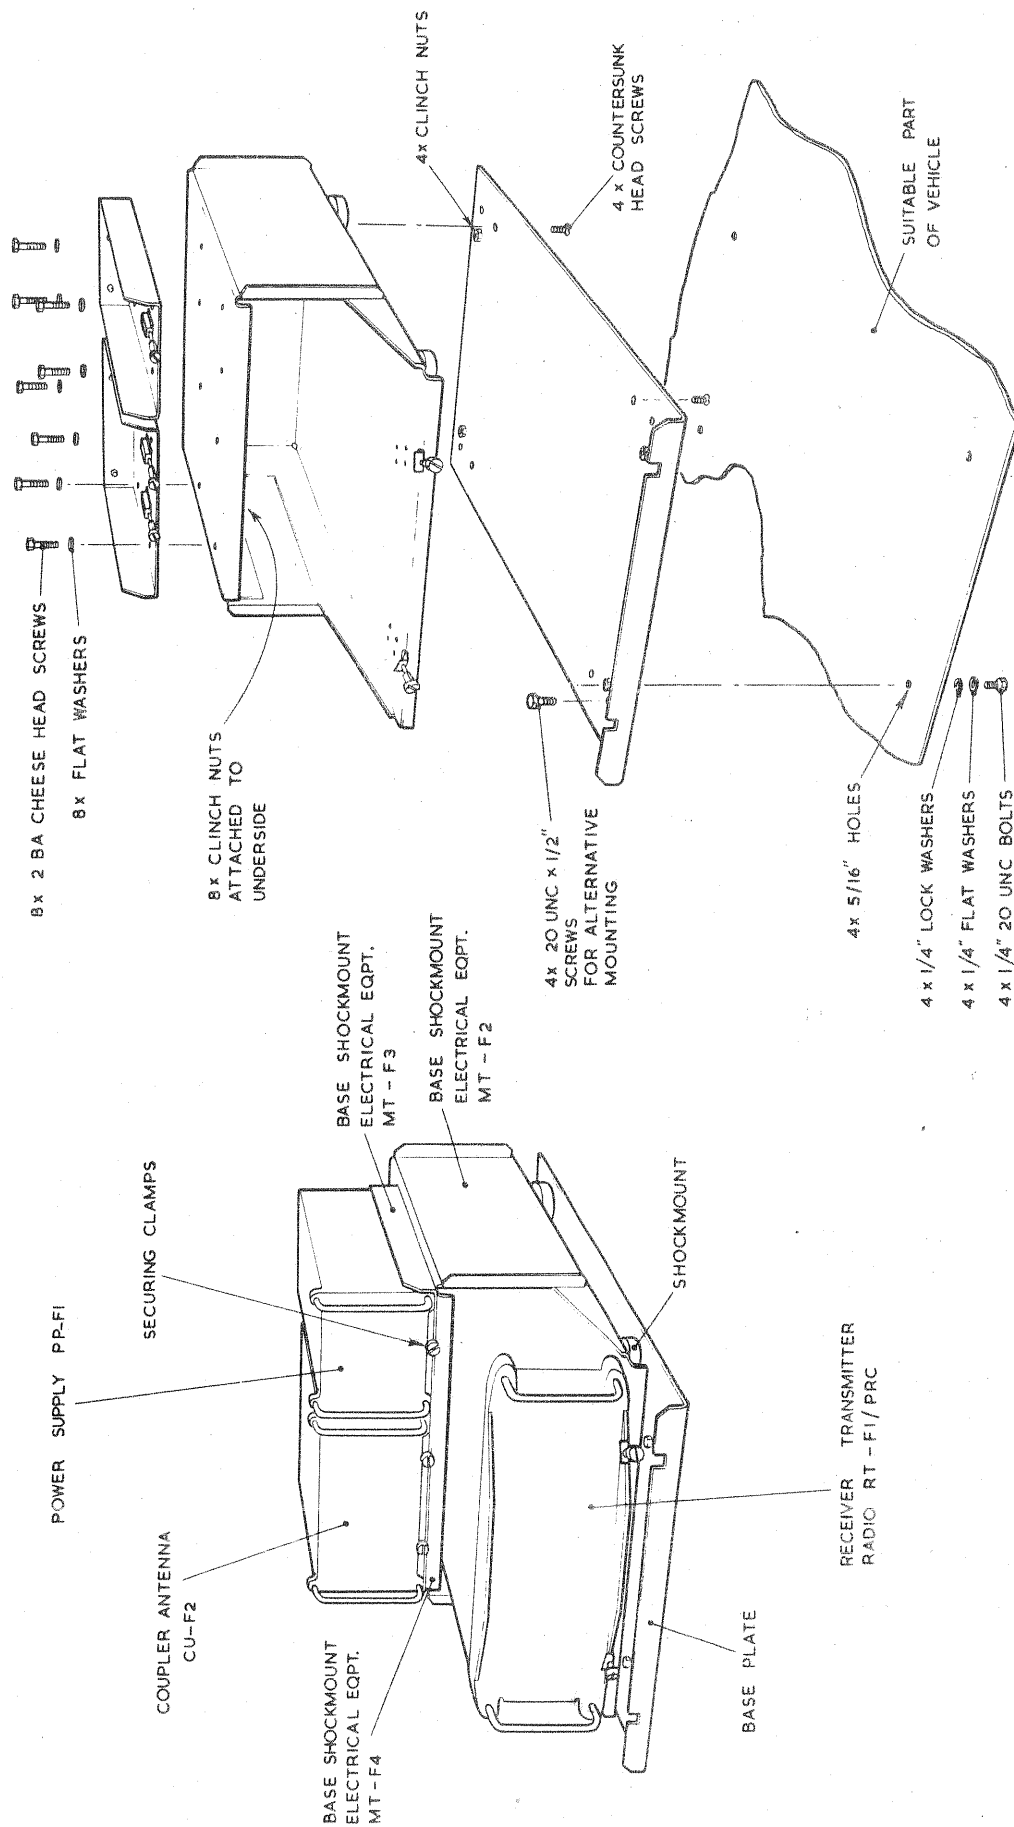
BASE, SHOCK MOUNT - ASSEMBLY DETAIL
